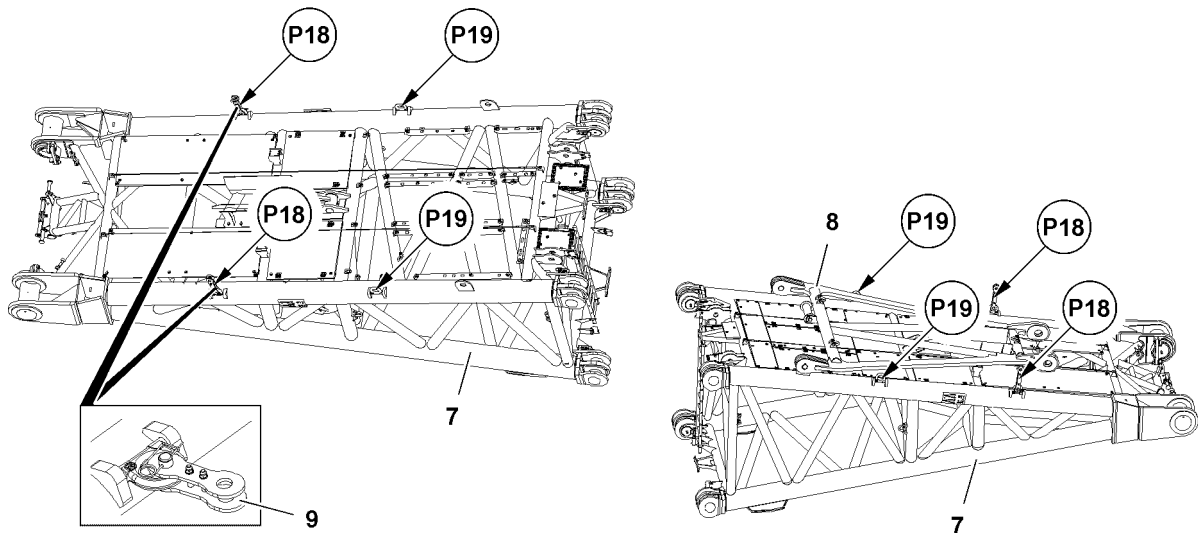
Fastening points for transport unit with W-pivot section and swing for WA-frame 2
